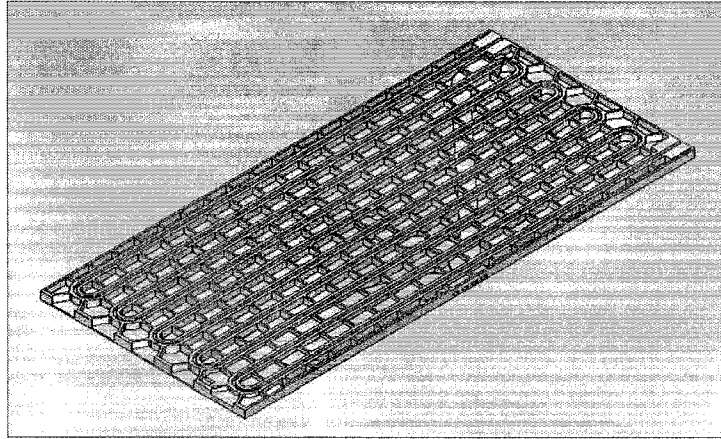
CAD model showing the original PHP design layout with 10 bends
